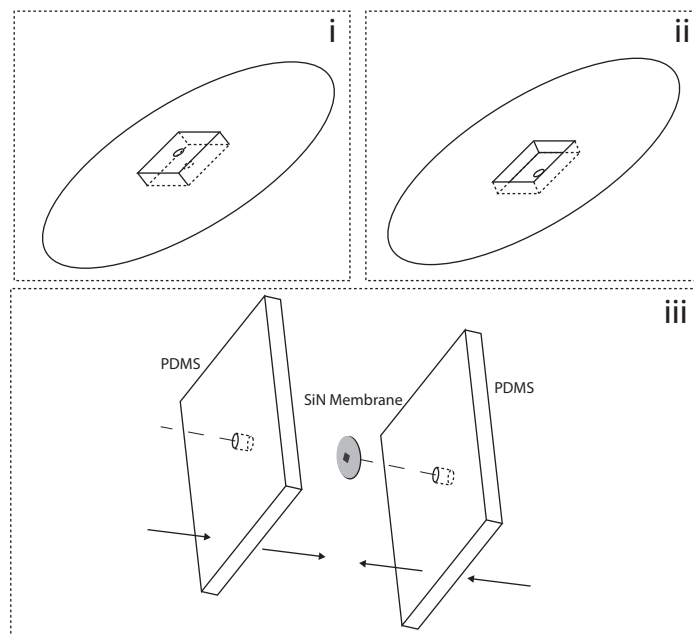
Holder #1 is a 2-part teflon-based holder. Each part fit together like a lego connection; the top piece has an extruding cube shape with a pin hole that fits into a cubed well in bottom piece, aligning the top pin hole to a bottom pin hole. Two polydimethylsiloxane (PDMS) layers act as the gaskets, sandwiching the silicon membrane and providing liquid tight seals.
